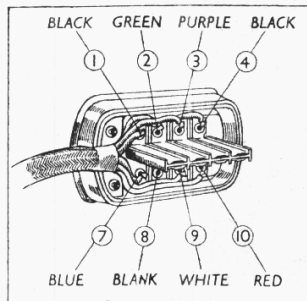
Sketch of underside of converter plug, with paxolin cover removed, showing pin connections, numbers and lead colours. Pin 8 is blank.
